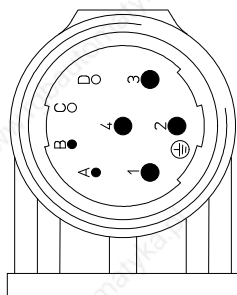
Front view of the power connector when right-angled fixed on the motor frame
